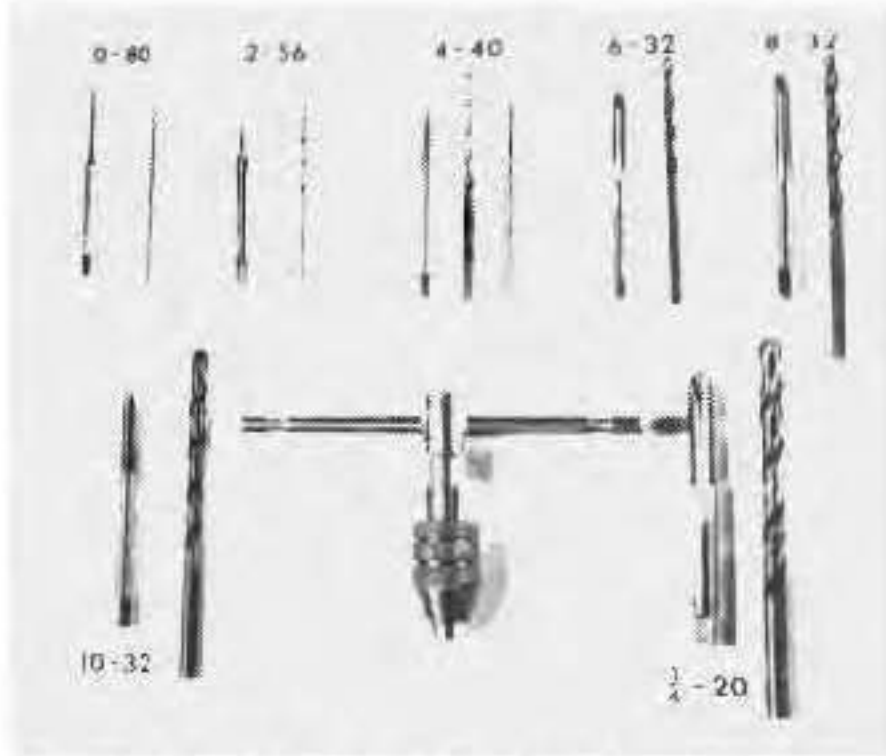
TAPS AND TAP DRILLS. First number indicates size; second, threads-per-inch.
